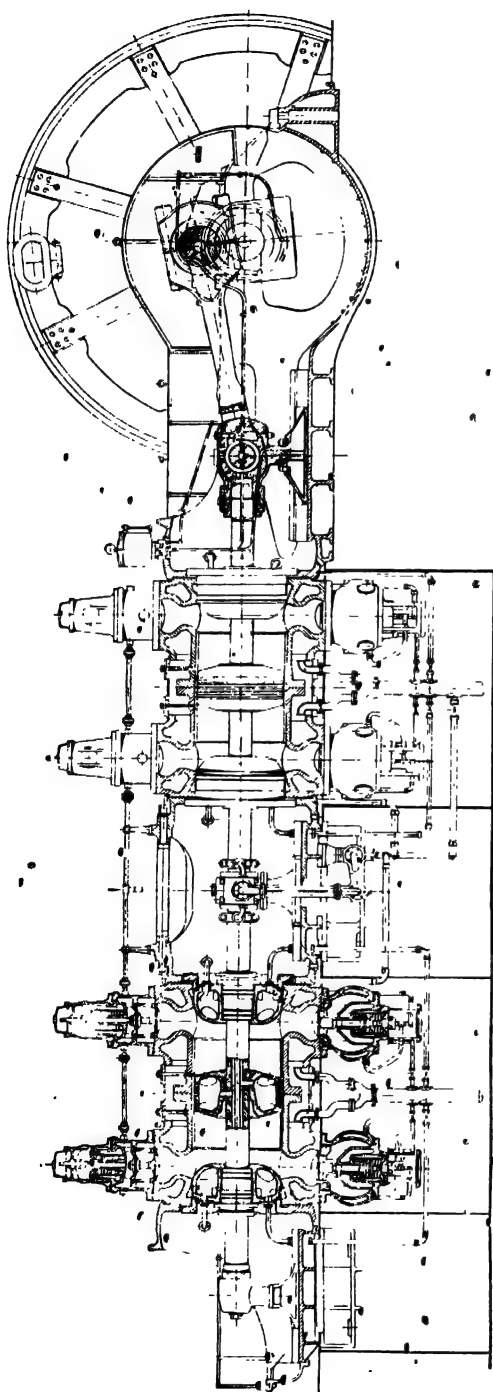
Section of an Eihardt & Schum r Gas-engine. Output, 2400 H.P., stroke, 1300 mm., 90 R.P.M.
